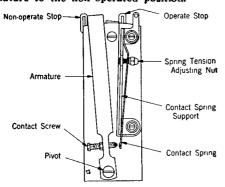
Arrangement of Operating Parts—85E, 85G, 85J and 85L Relays.
